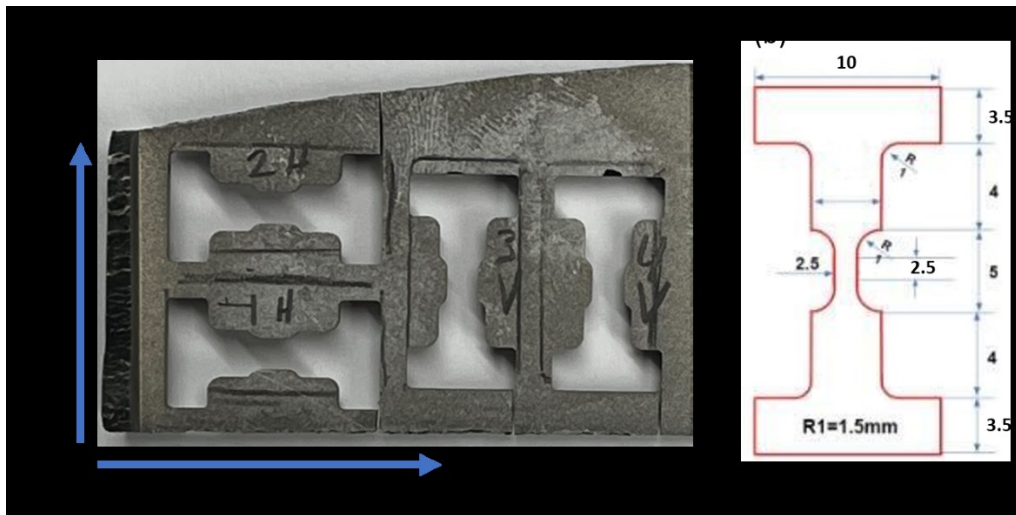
(a) The cutting layout. (b) The dimension of the tensile specimen (all dimensions are in mm).
